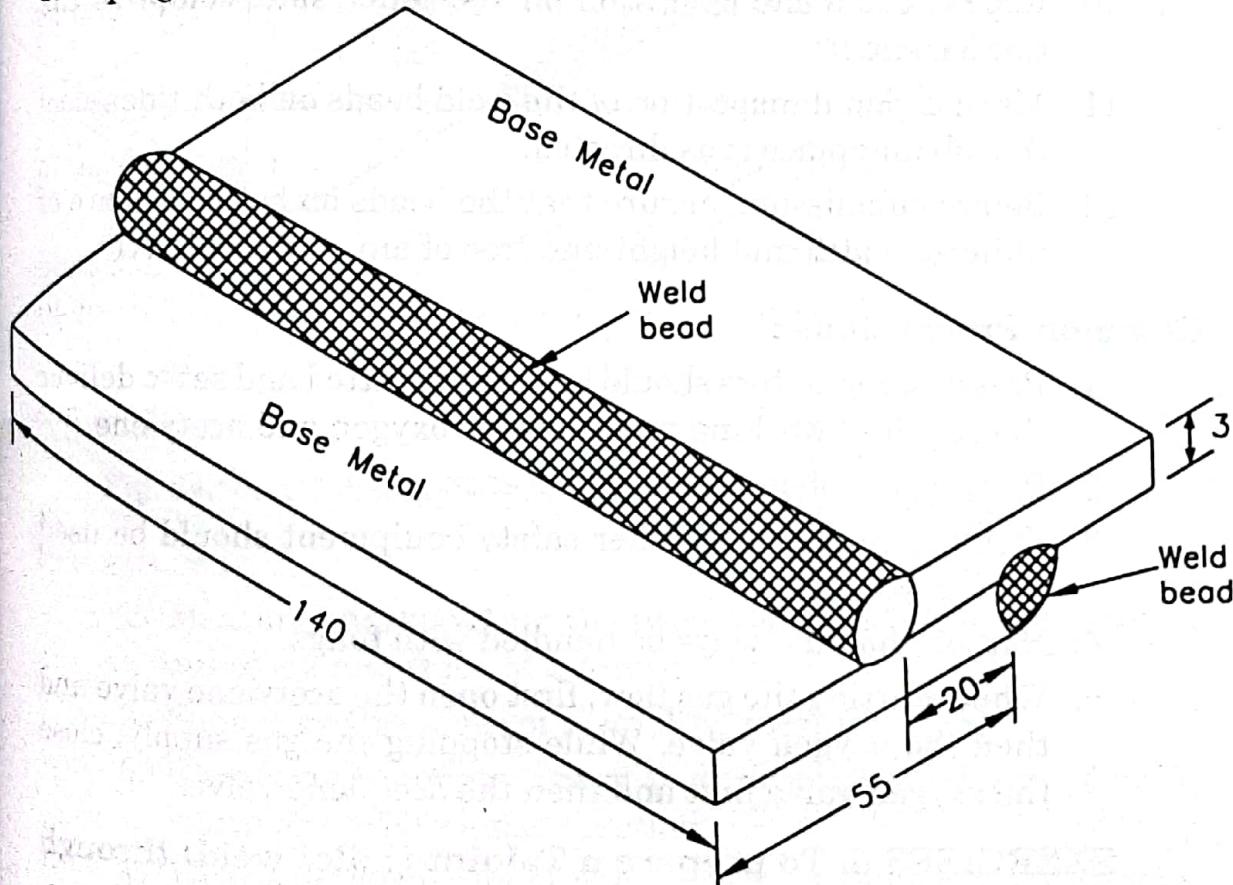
A Lap Joint (Fillet Weld) through Gas Welding in Flat Position.
